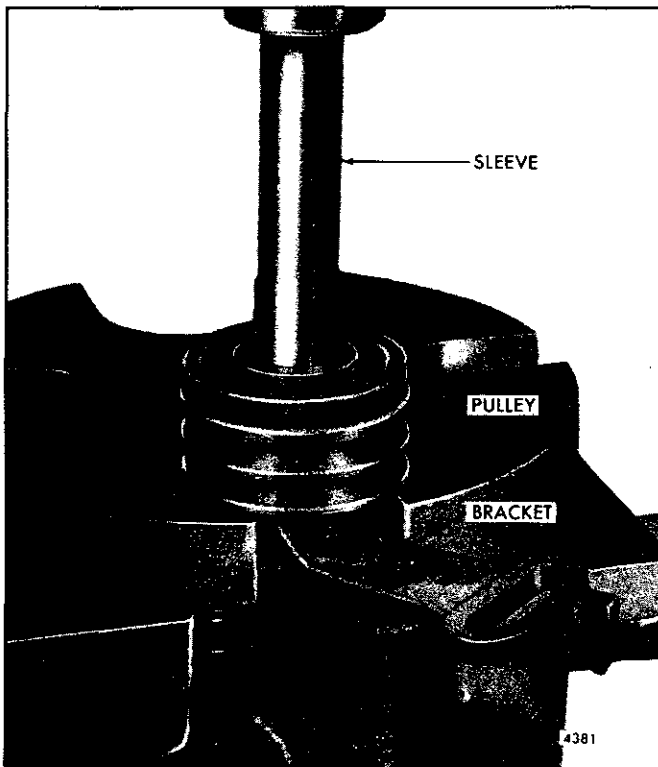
Removing Shaft and Bearing Assembly and Bracket from Idler Pulley
